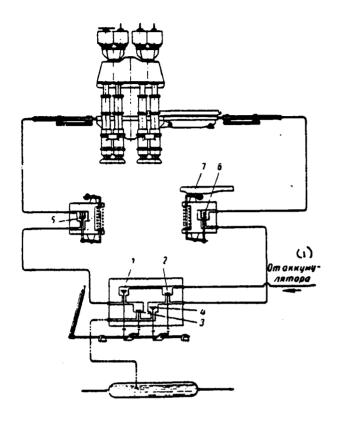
The hydraulic schematic of the extensible table of stamping machine by effort/force 30000 t: 1 and 2 - pressure valves; 3 and 4 - drain valves; 5 and 6 - throttle (brake) valves; 7 - cams, fastened on roller table.
